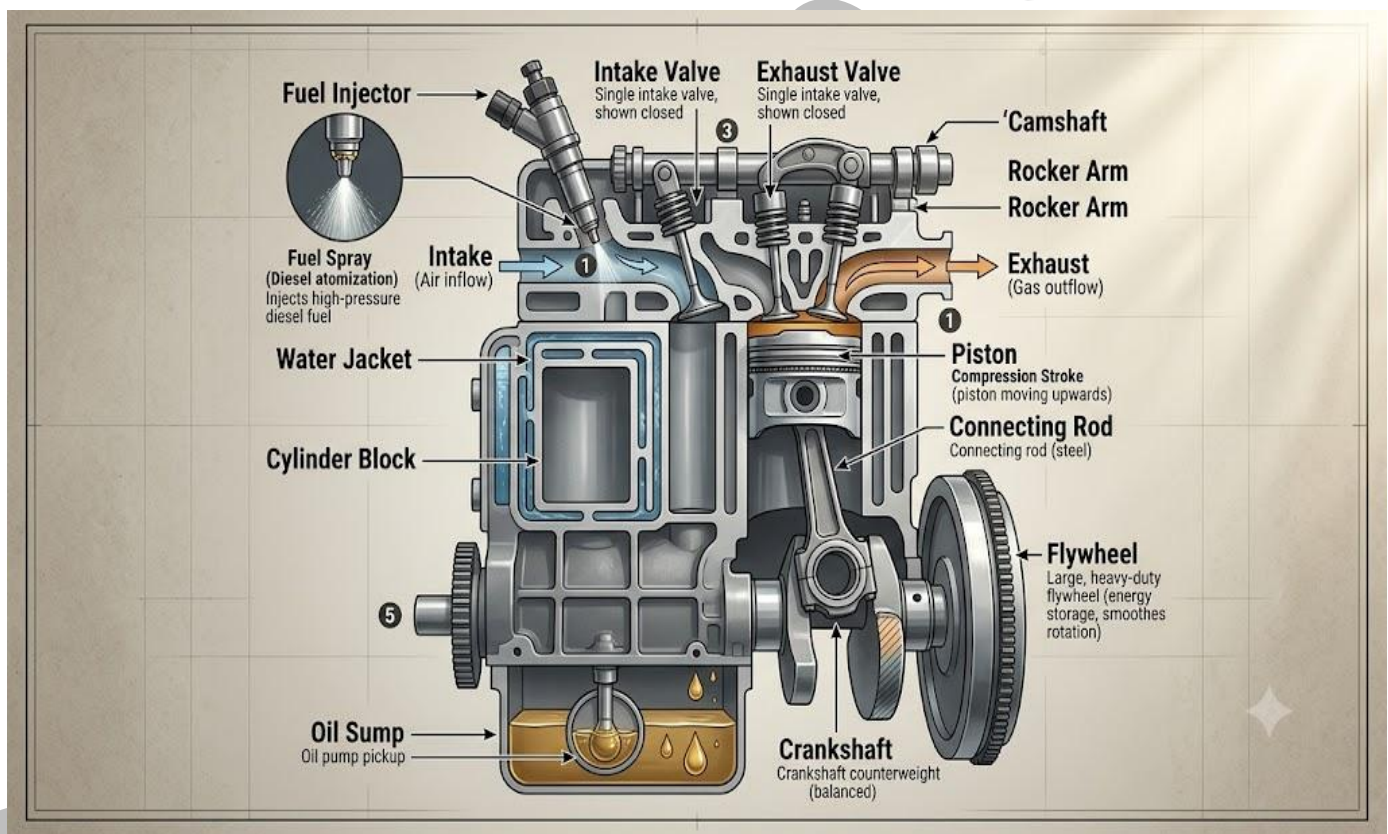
Cross-section of a four-stroke diesel engine showing main components
